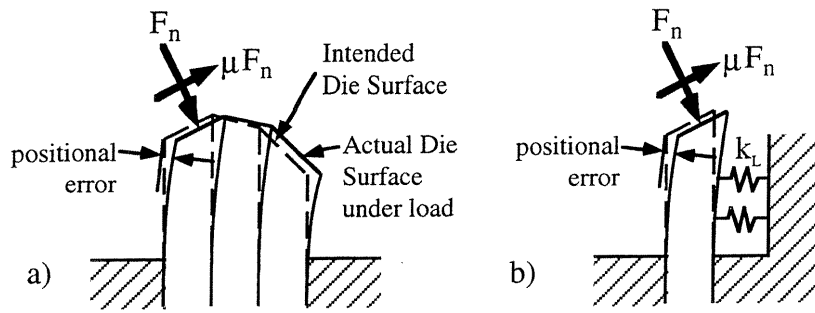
a) Group of die laminations subjected to forming loads and b) modeled as cantilevered Euler beams in a parallel configuration
